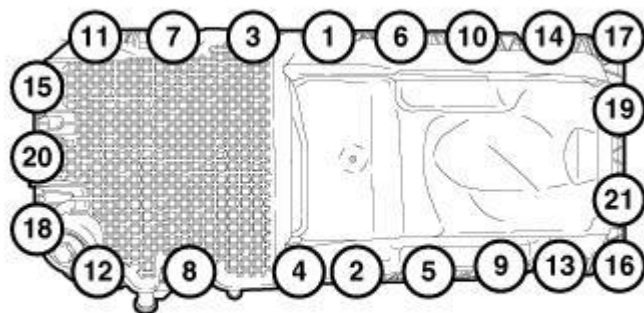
Remove/Install Oil Pan Retaining Bolts
